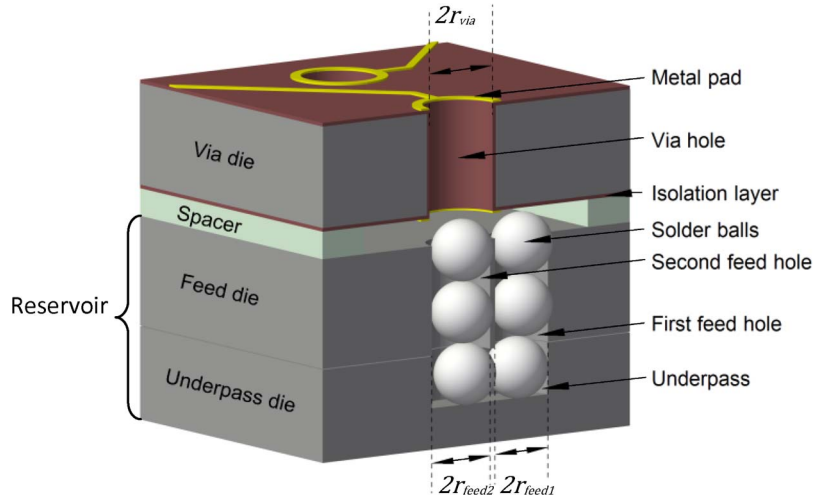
Cross-sectional schematic of the advanced solder pump structure.
